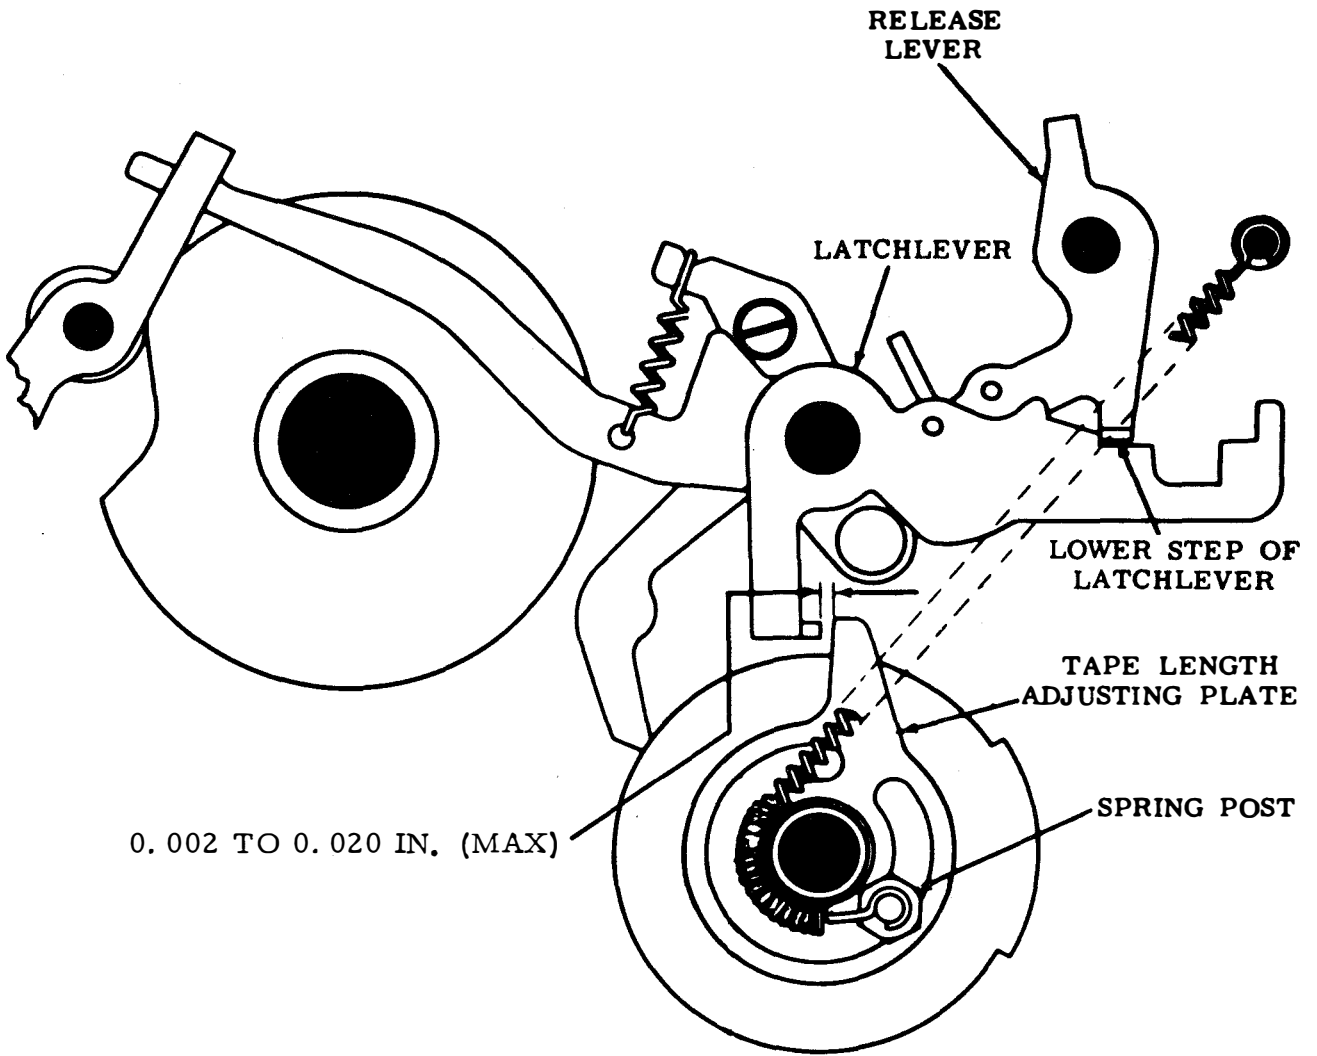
Tape Length Adjusting Plate, Reperforator, Front View
